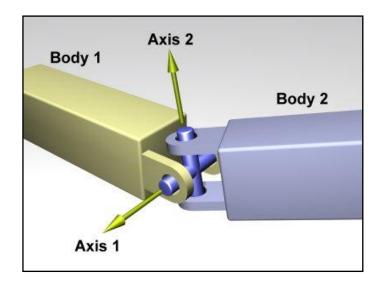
MECHANICAL NATURE OF A CARDAN JOINT.
